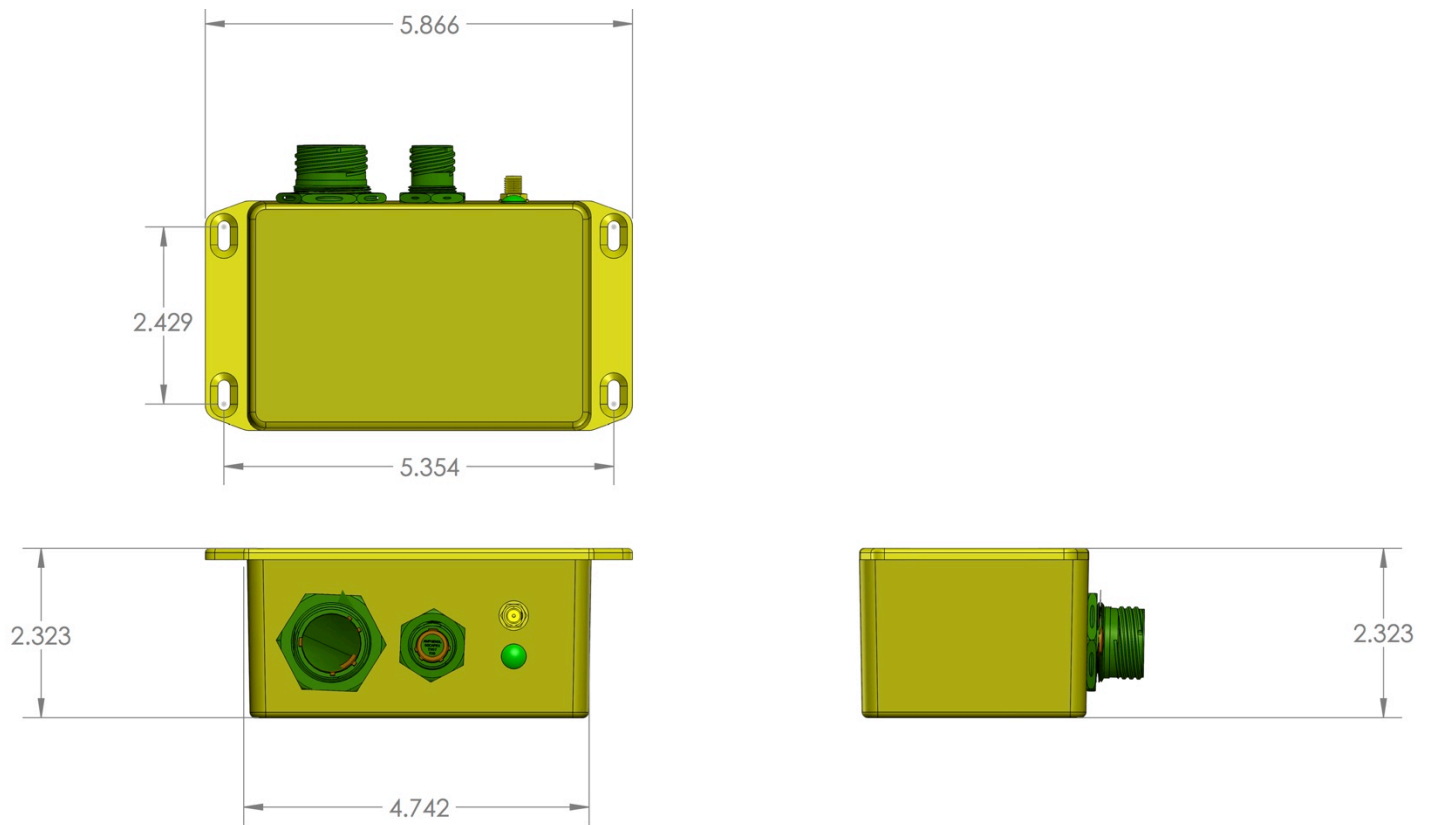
VSC-009 Mechanical Drawing (All Dimensions in Inches)
